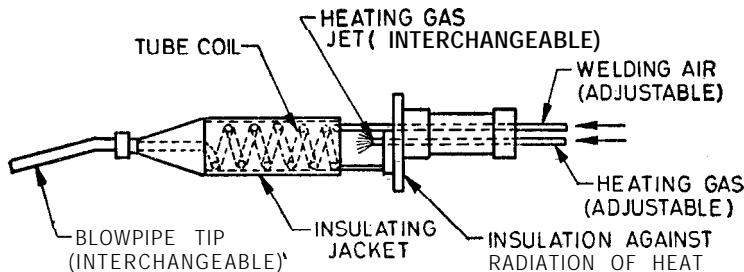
GAS-HEATED HOT GAS WELDING EQUIPMENT
